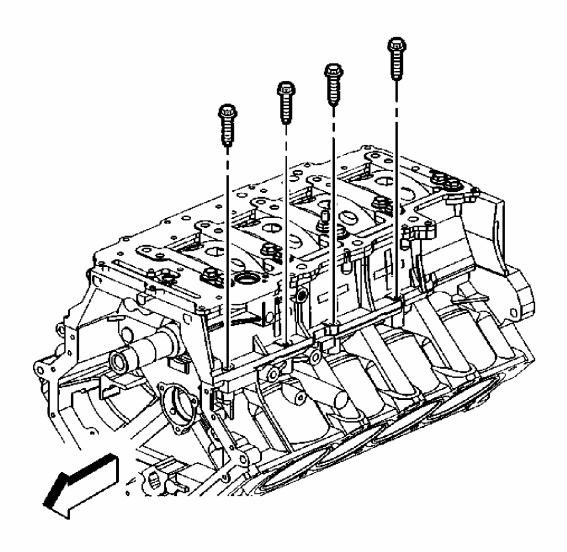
Identifying Crankcase Perimeter Retaining Bolts on Right of Engine Courtesy of GENERAL MOTORS CORP.
